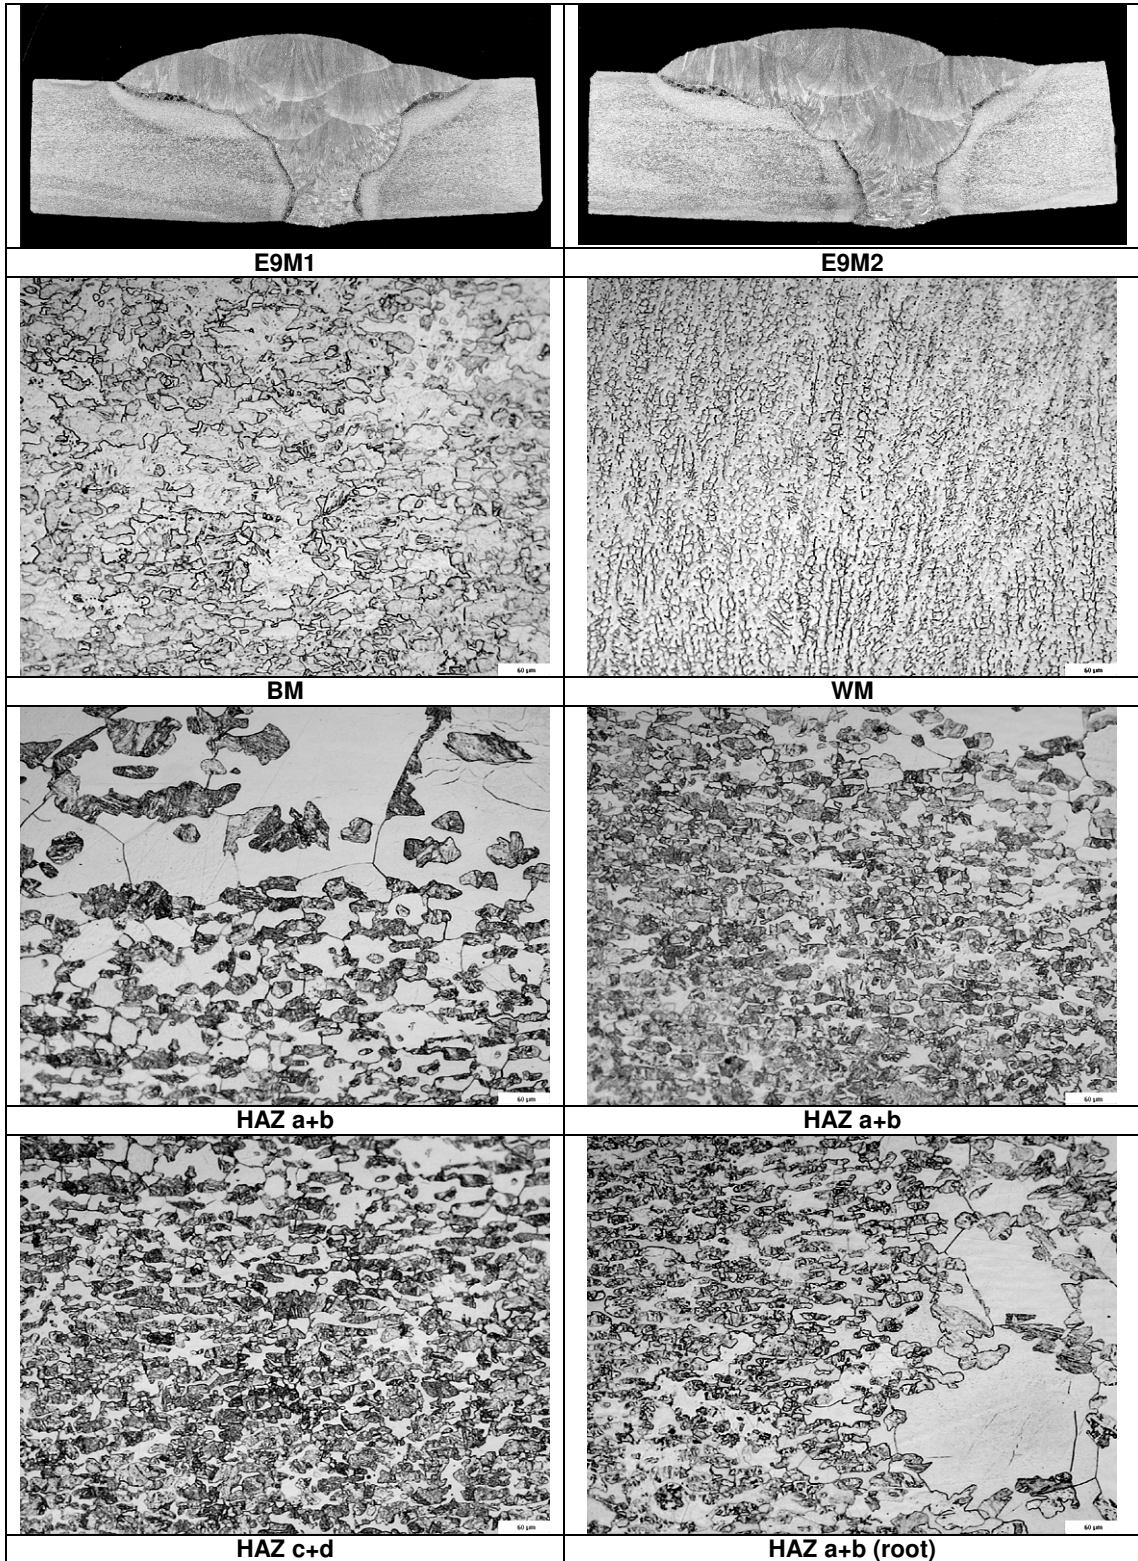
Macro and microphotographs of 12 mm thick SAW weld with 309 filler (E9).
